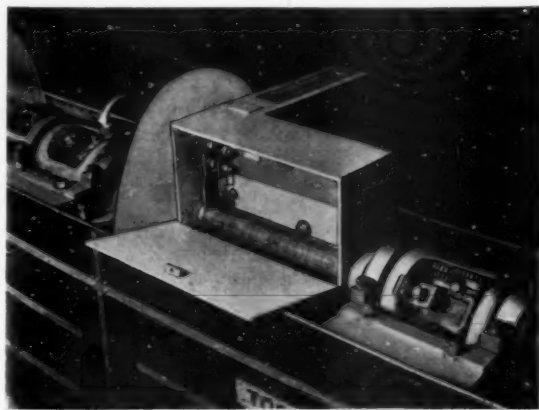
Inductor and driving gear box for bar stock hardening machine.
